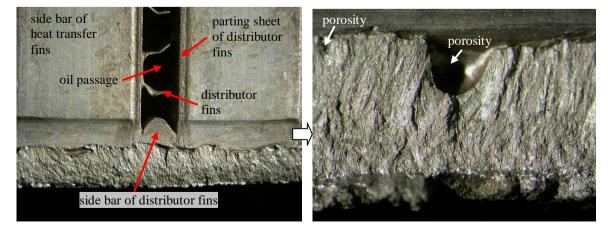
Fracture surface of the weld joint between header and side bar/parting sheet
